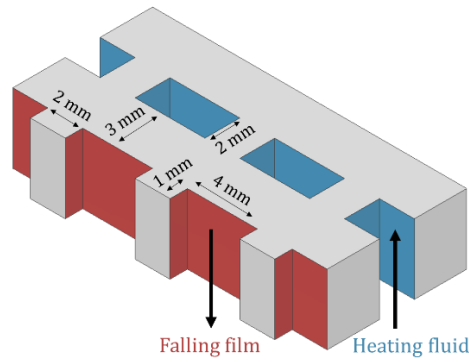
Schematic cross-sectional view of the grooved plate evaporator (Collignon and Stutz, 2023)
